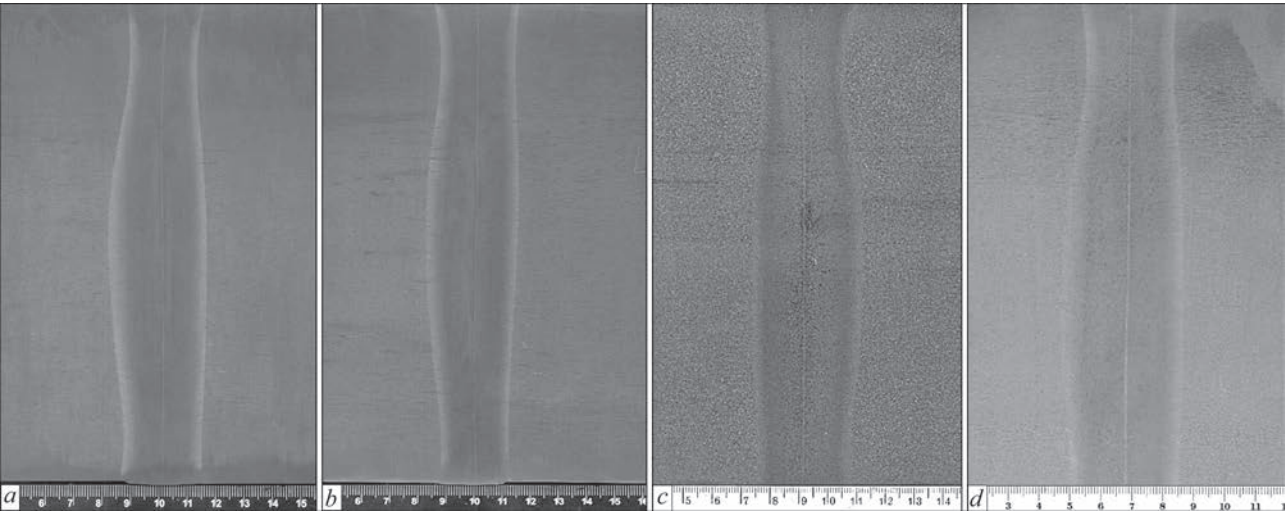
Macrosections of rails of different steel grades in pulsed flash-butt welding in the optimum modes *a* — R350HT (HAZ — 28 mm); *b* — K76F (HAZ — 27 mm); *c* — R260 (HAZ — 31 mm); *d* — M76F (HAZ — 37 mm)
